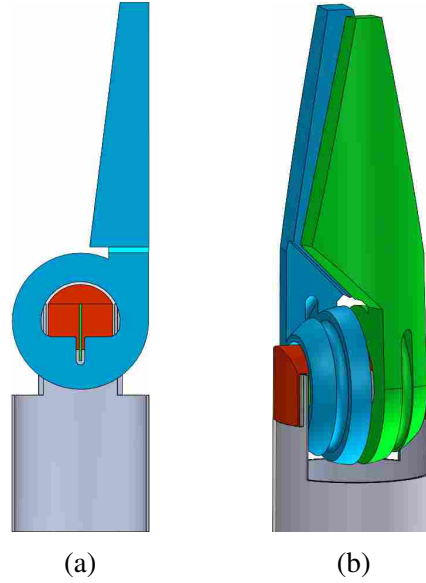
6 mm L-Arm model. (a) shows a section view with the jaw shown in blue, the NiTi flexure in green, and the fixed portion in red. (b) is a model of the assembled mechanism.
